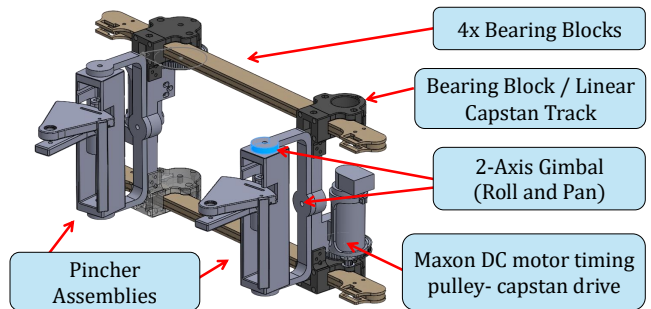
Full mechanical assembly of the PHABS device, showing the two pincher assemblies mounted on bearing block carriages that translate along parallel wooden rails. The central column houses the Maxon DC motor and capstan drive for lateral force feedback, with two-axis gimbals connecting each pincher to its respective carriage.
